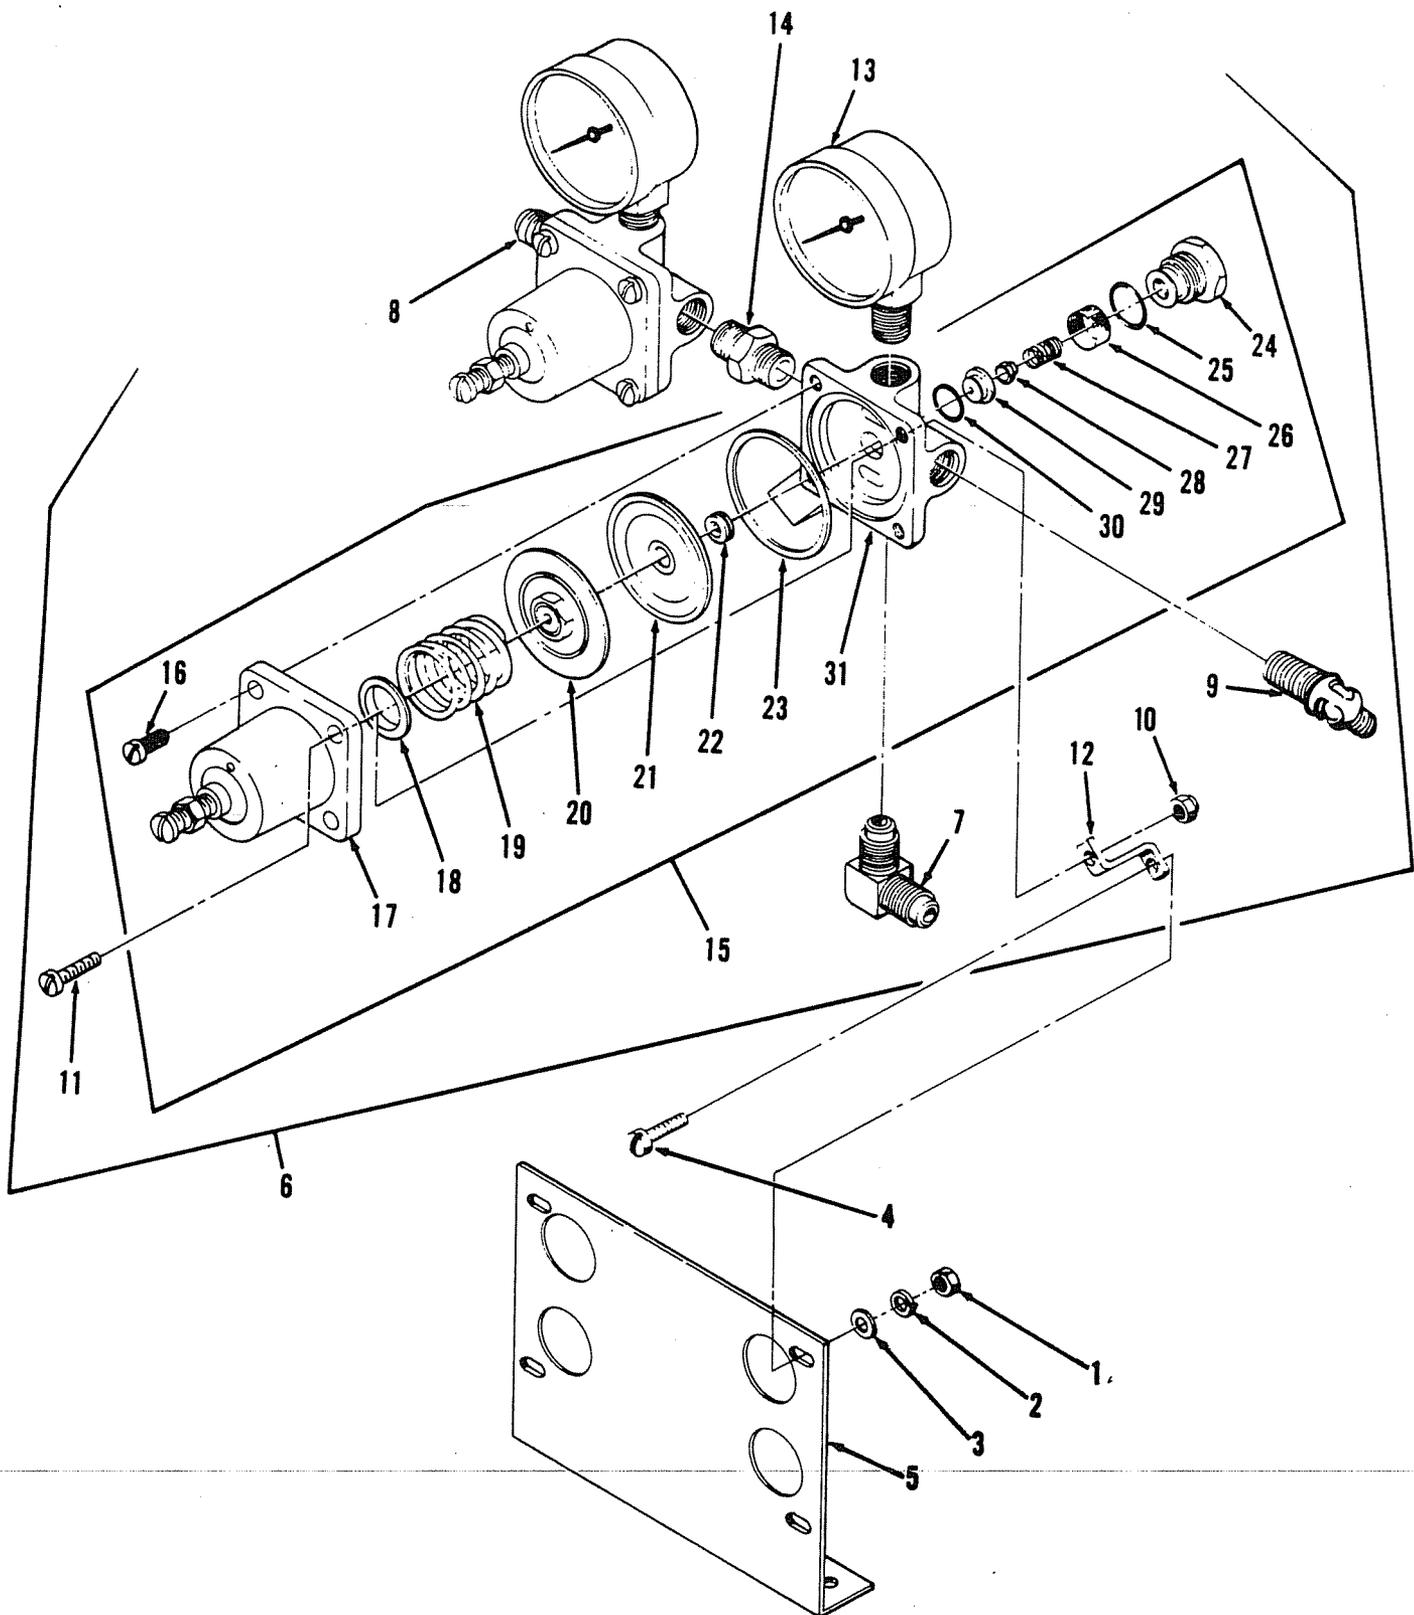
Secondary CO₂ Regulators and Bracket Assembly
